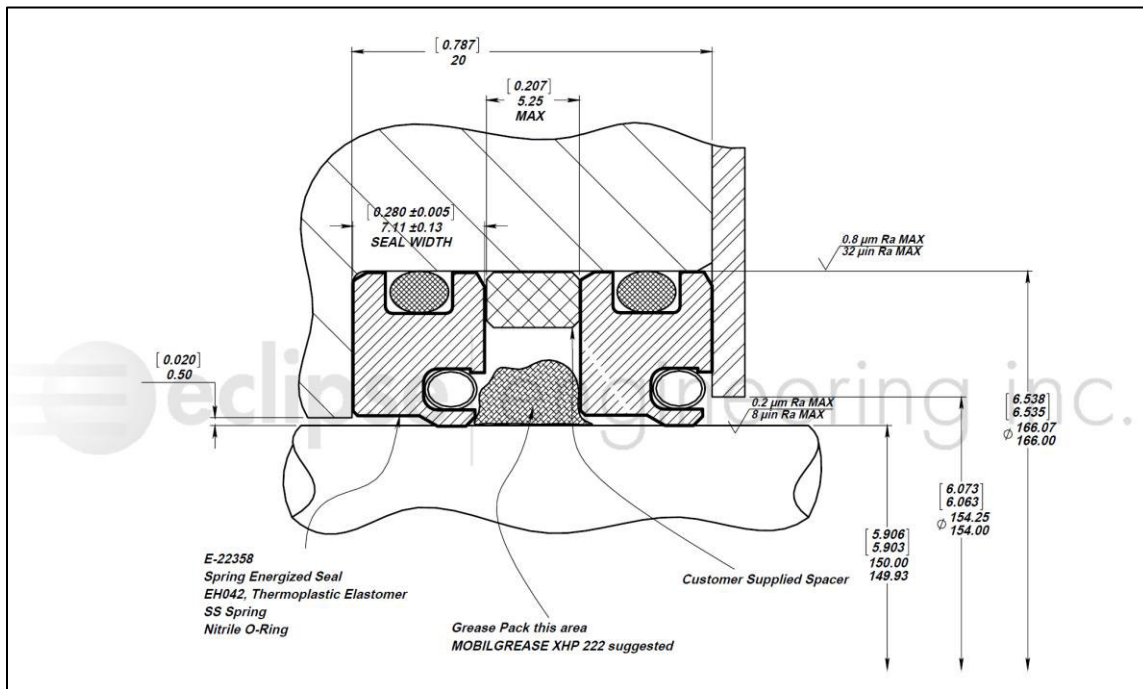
Cross sectional drawing of the dynamic rotary seal design on the gearbox side of the mooring drum shaft. Drawing provided by Eclipse Engineering Inc.
